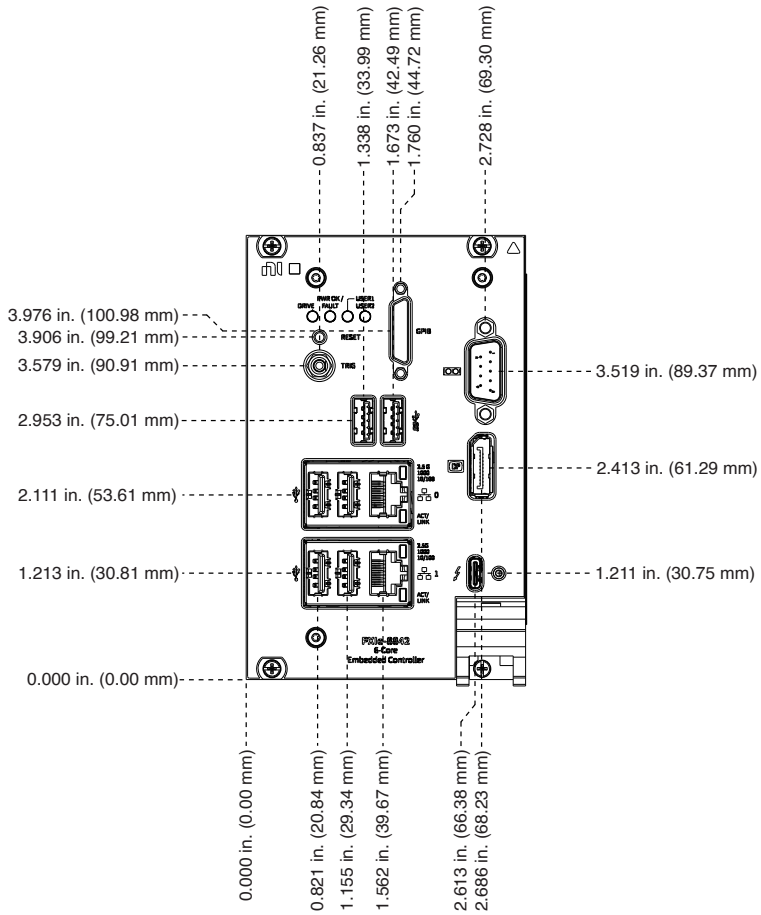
PXIe-8862 Front Panel Layout and Dimensions
